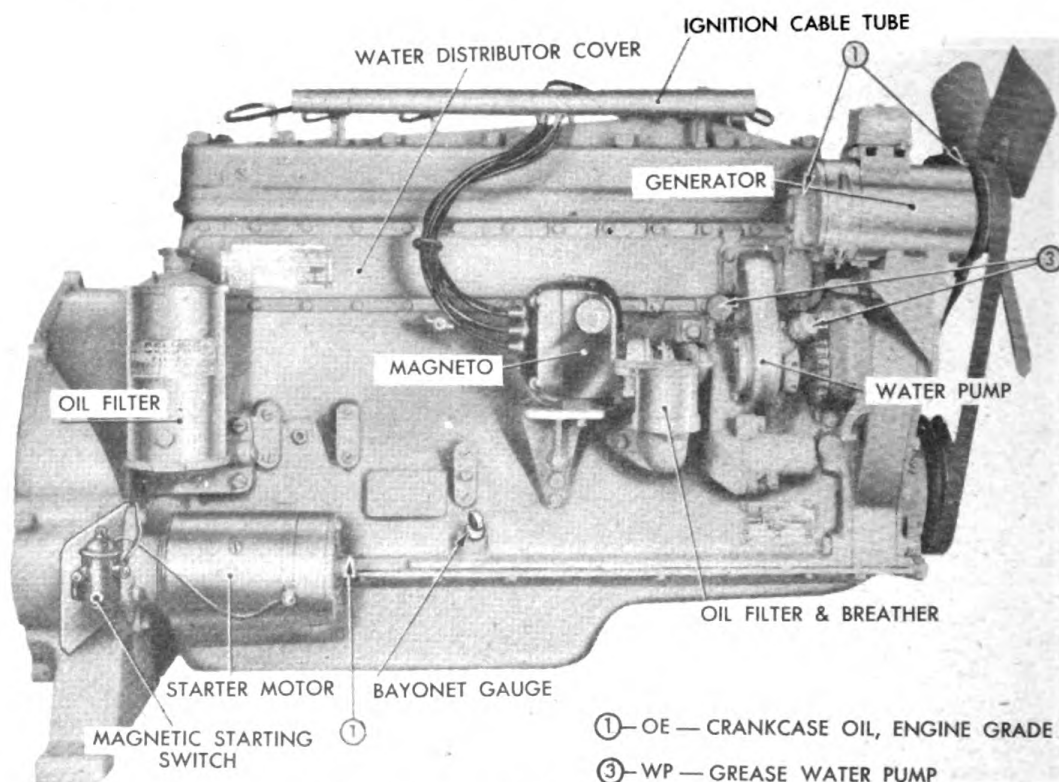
Right Side of Figure Showing Accessories and Points of Lubrication
